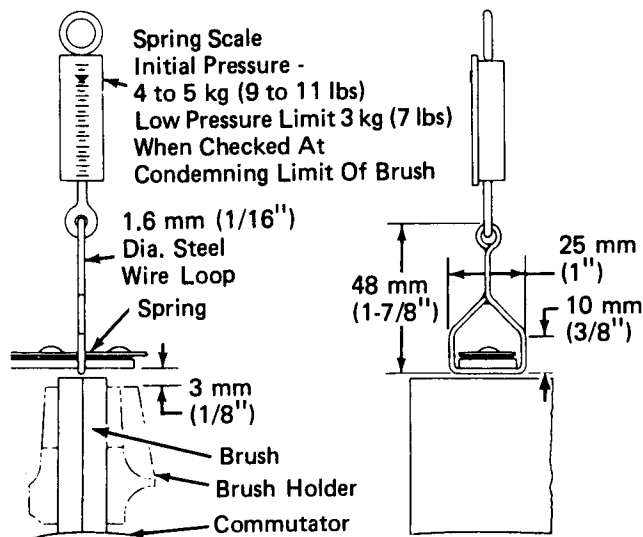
Measuring Coil Spring Brush Holder Finger Pressure
